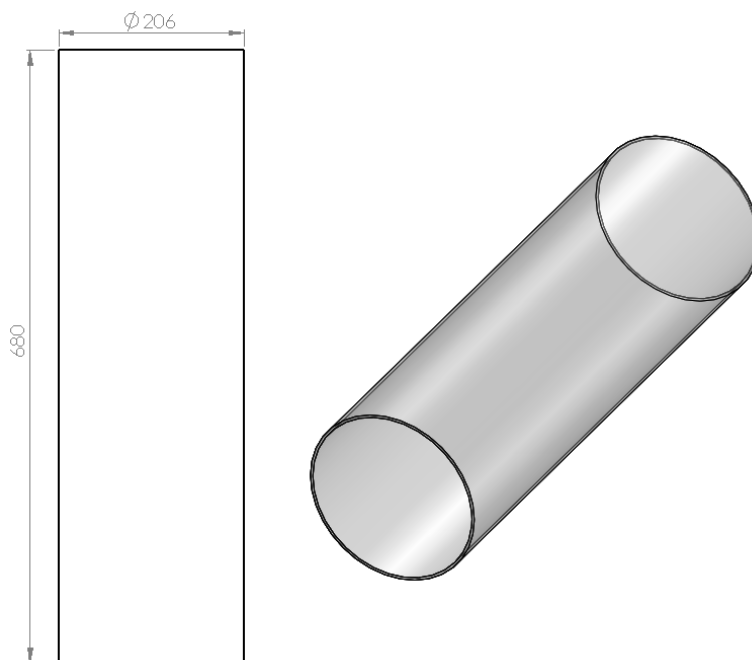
Glass quartz drawing - all dimensions in mm
